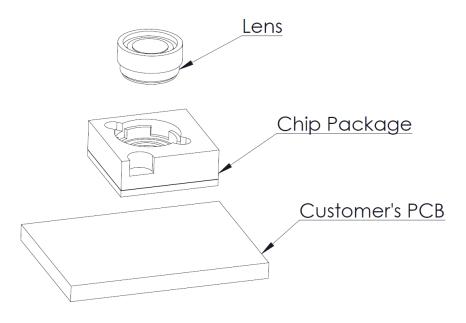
Exploded View of System Assembly (with L214-ZSZ)
